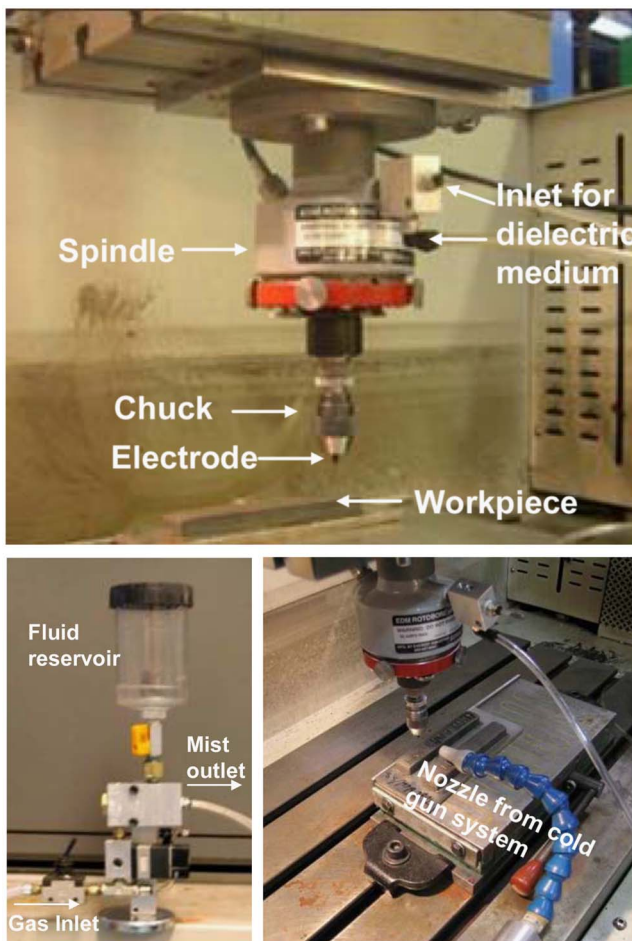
Dry and near-dry EDM experimental setup: (a) rotary spindle and electrode, (b) spray delivery device, and (c) nozzle to deliver cold air
